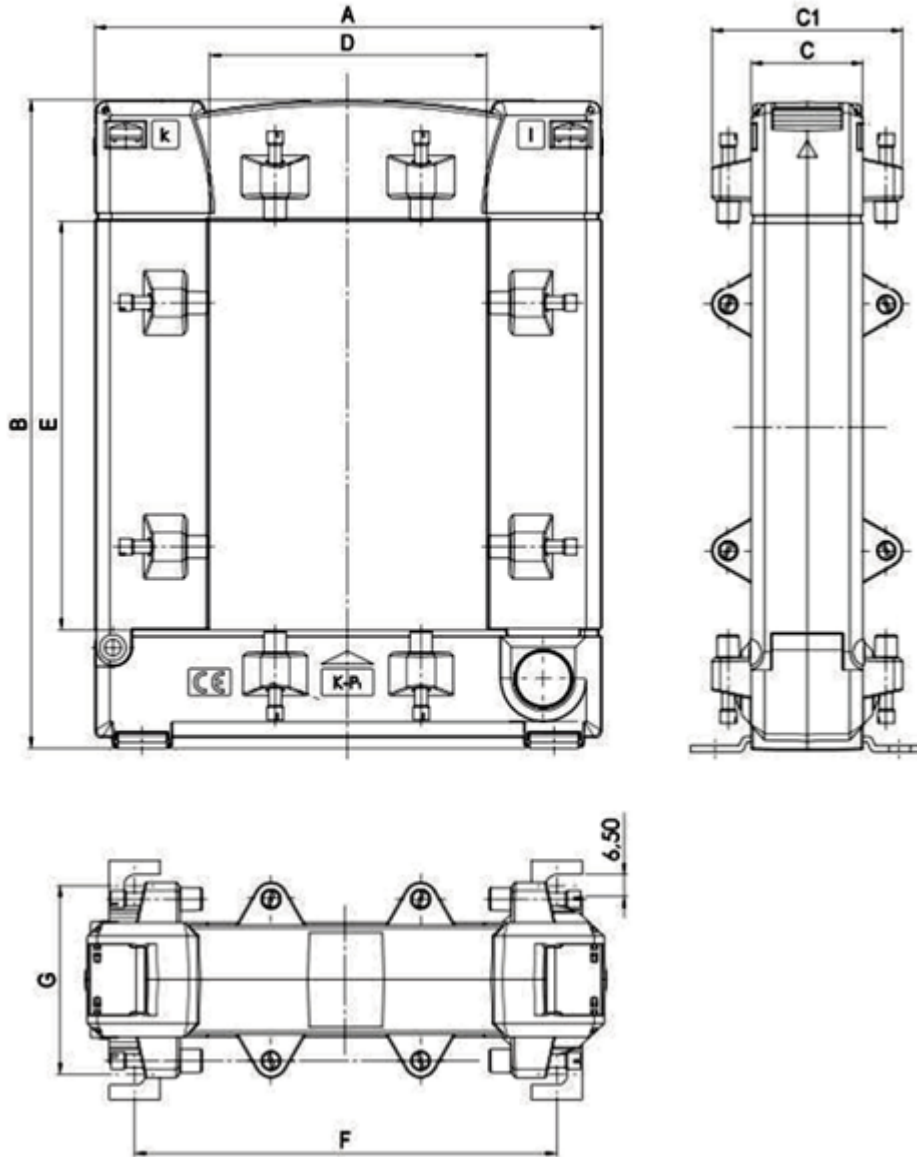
SCT7xxx dimensions, sizes 1 - 4
